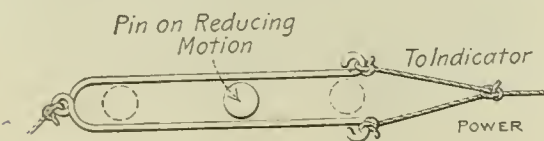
CONNECTOR FOR HIGH-SPEED ENGINES
